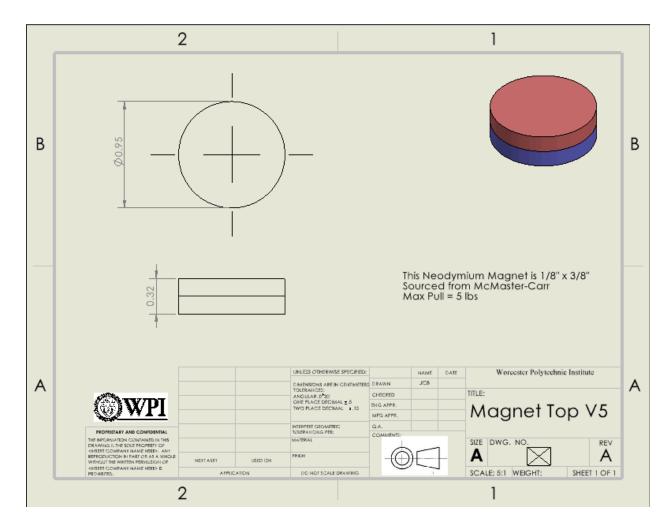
CAD Drawing schematic for top magnet, which was inserted in the slider, which was used in the final design.
